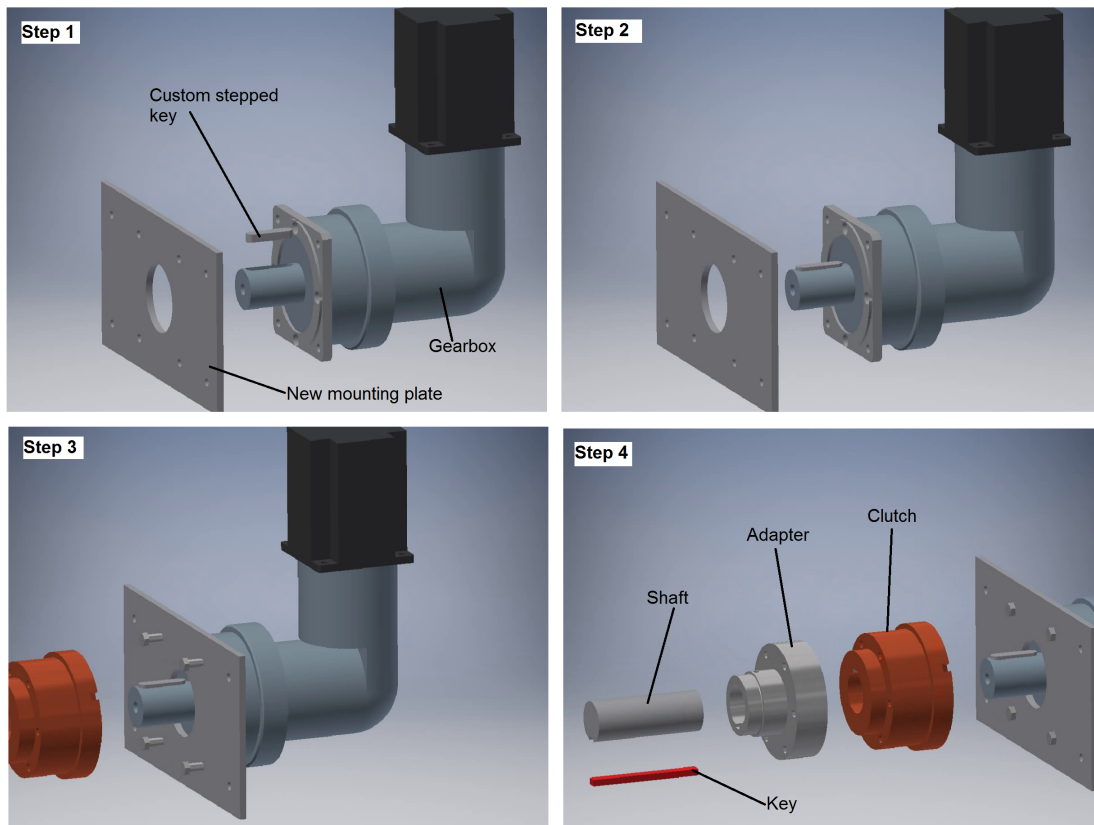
Procedure for assembly-1 of the clutch system - bolting of gear box, clutch, adapter and new box channels - Step1 to Step4.
